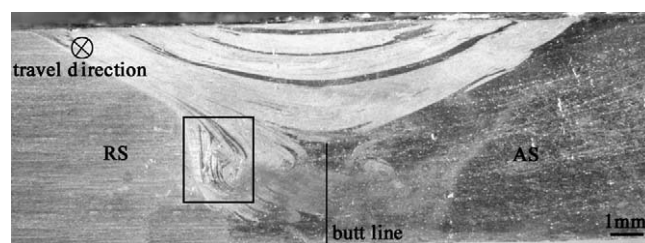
Cross section of friction stir weld in AZ31 magnesium alloy.
